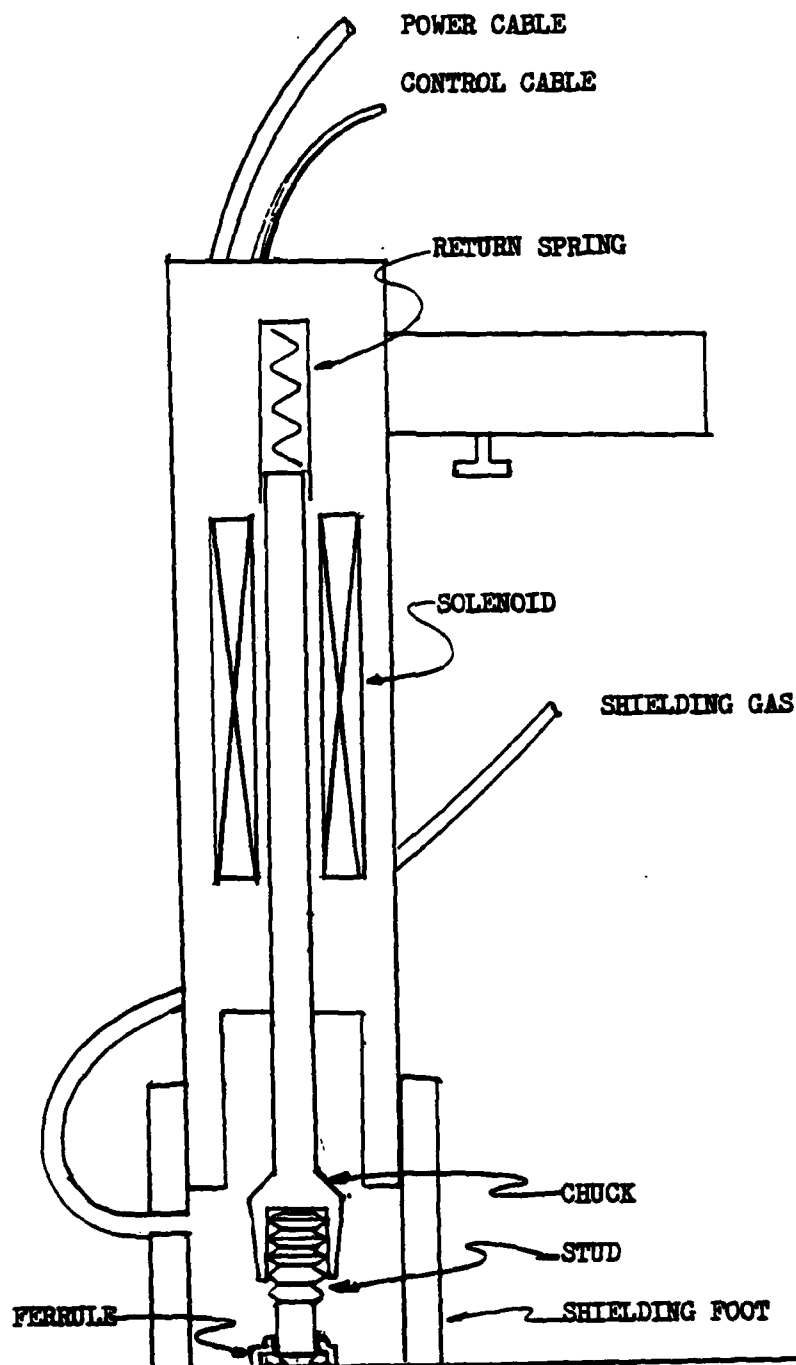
BASIC CONFIGURATION OF M.I.T. UNDERWATER STUD WELDING GUN
